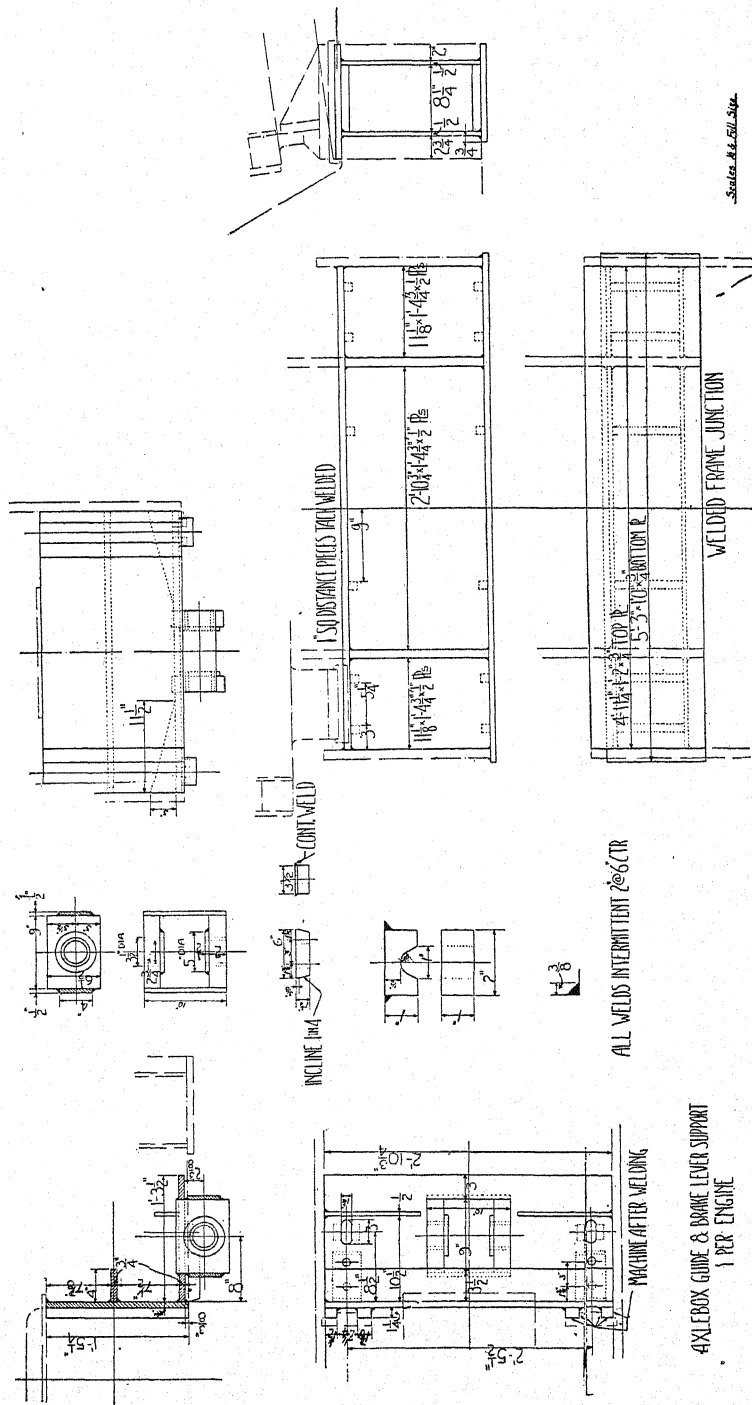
Junction of main and rear frames in welded construction.
